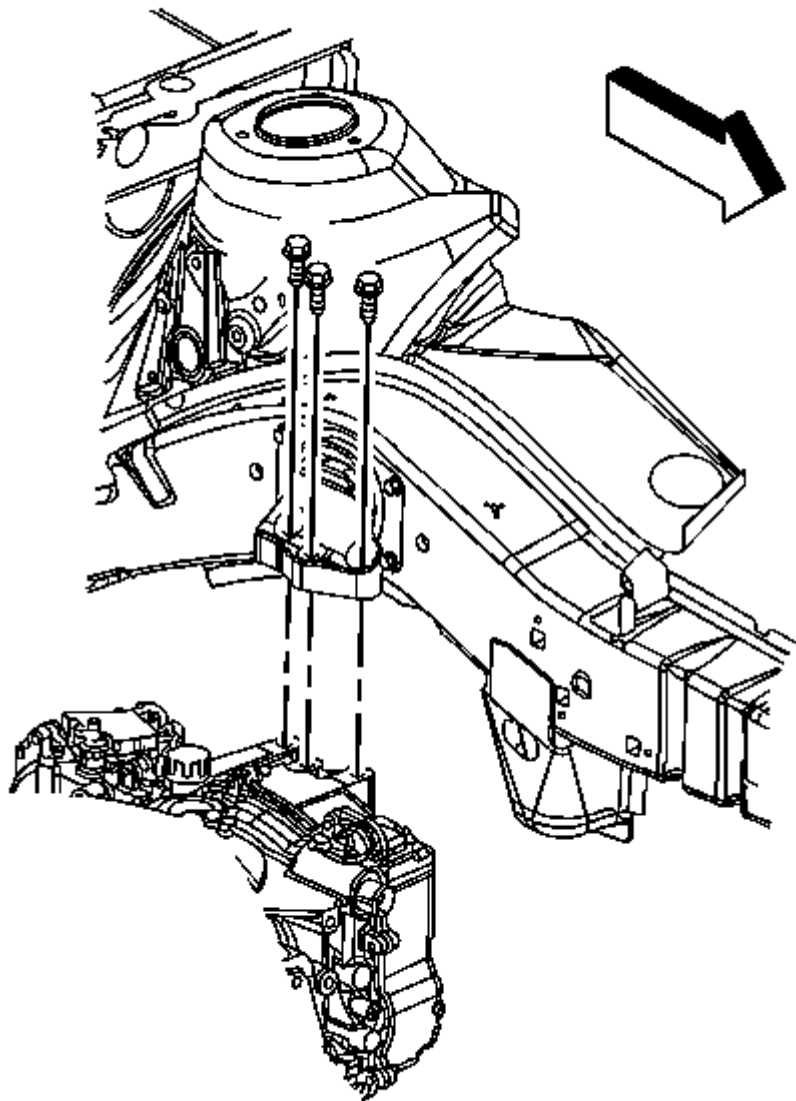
Identifying Transmission Mount Bracket-To-Transmission Bolts
